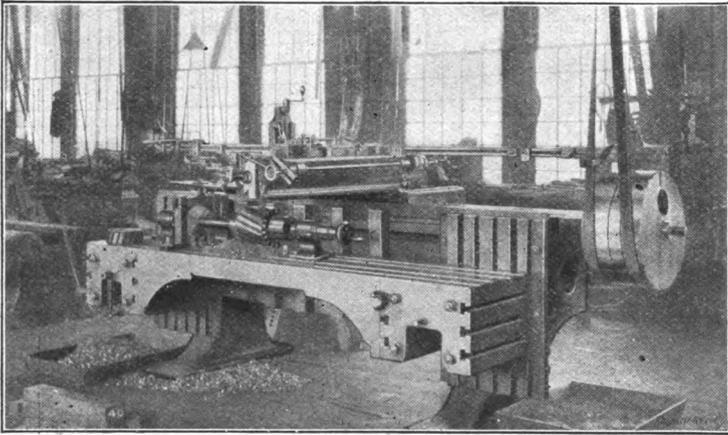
Richards Type Shaper fitted with Attachment for Grooving Milling Cutter Bodies
